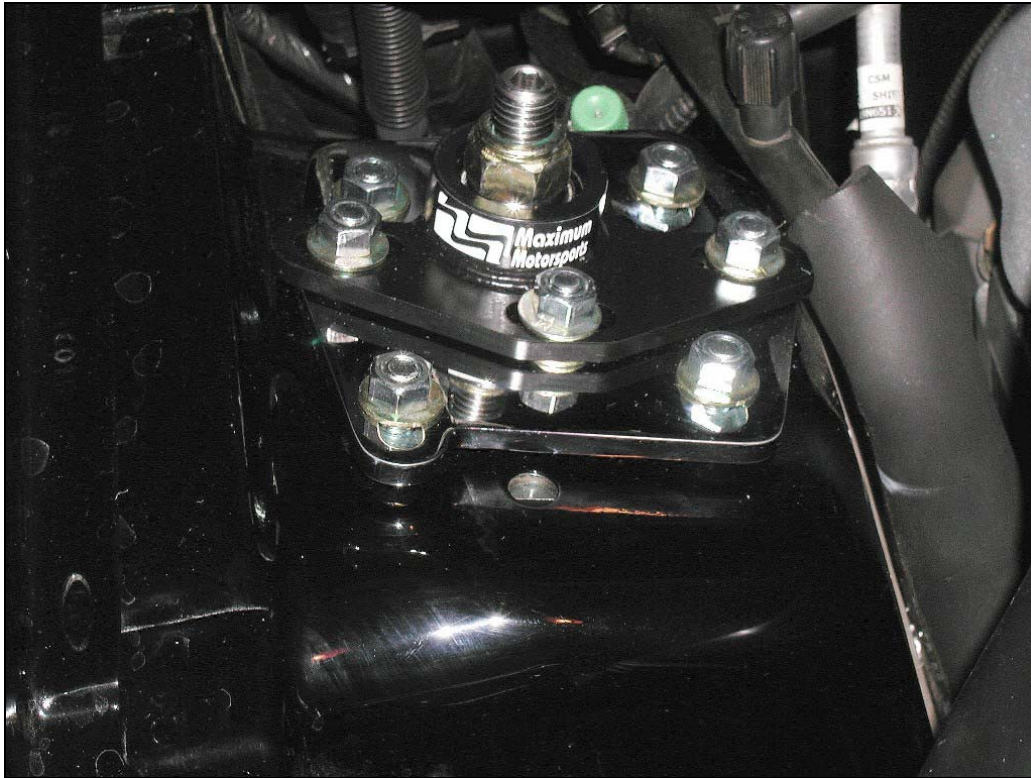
New passenger-side MM caster/camber plate installed on strut tower
